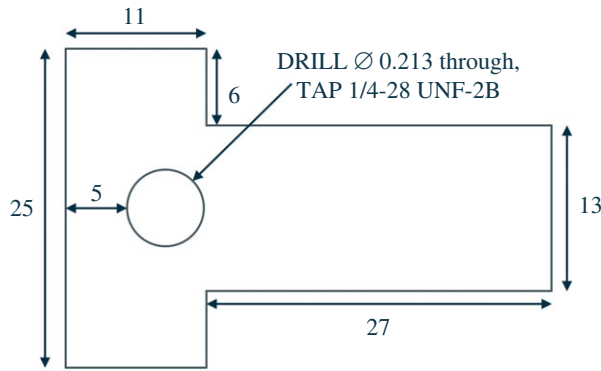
Profile of test specimen, where out-of-plane thickness is 3 mm. Tapped hole is for mounting of accelerometer. All dimensions are given in millimetres, except tapped hole dimensions, which are in inches.
